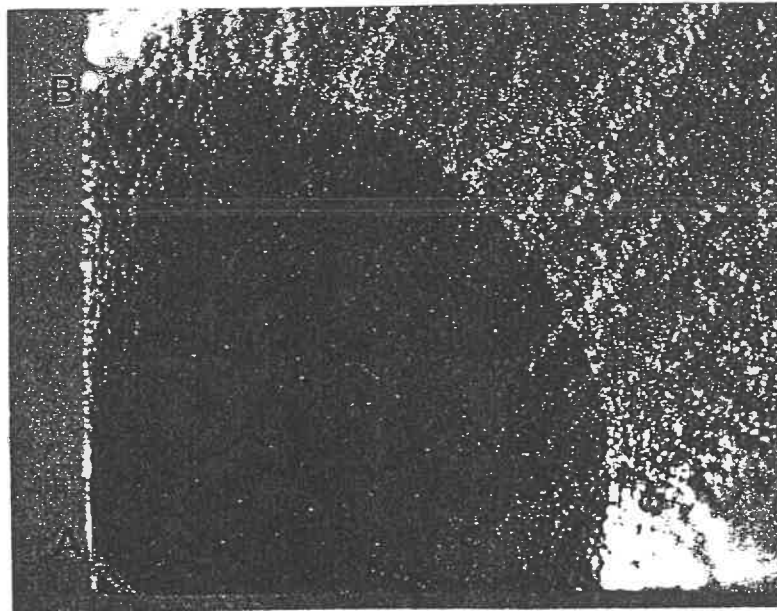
FRACTURE FACE OF CC SPECIMEN BT4 SHOWING LOCATION OF INITIAL NOTCH LENGTH (A) AND FINAL CRACK LENGTH (B) USED FOR PD CALIBRATION CURVE
